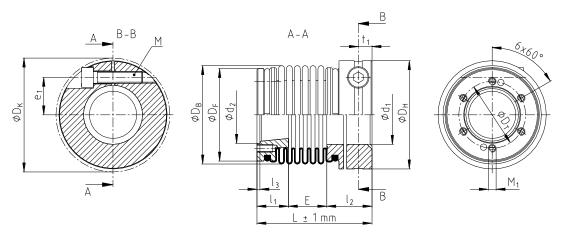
TOOLFLEX® type CF - example of drawing: type M-CF
